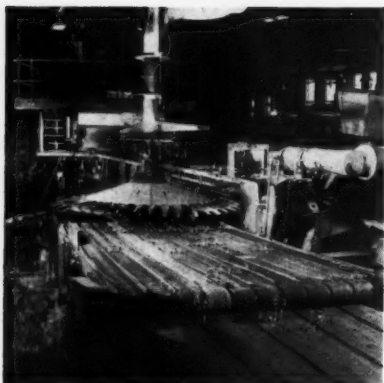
Finished bulbs being discharged from the rotary turntable on to the belt conveyor.
